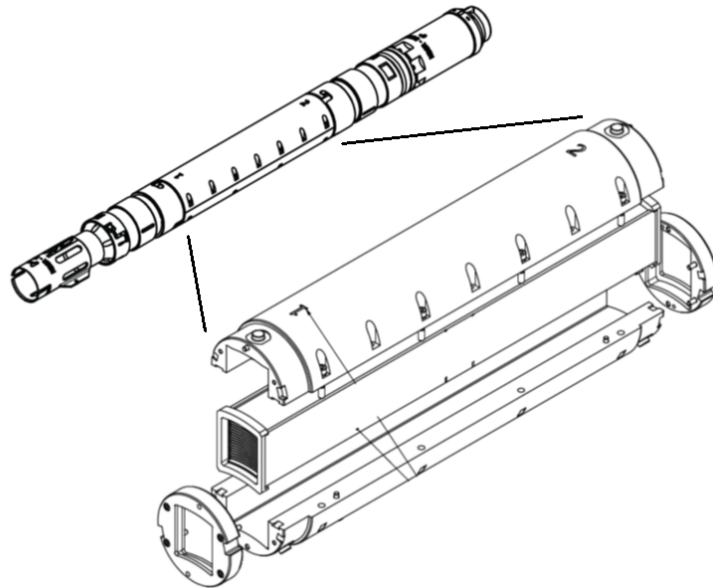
MUSTANG-R basket with connection pieces (top) and example fuel assembly in exploded basket illustration (bottom)
